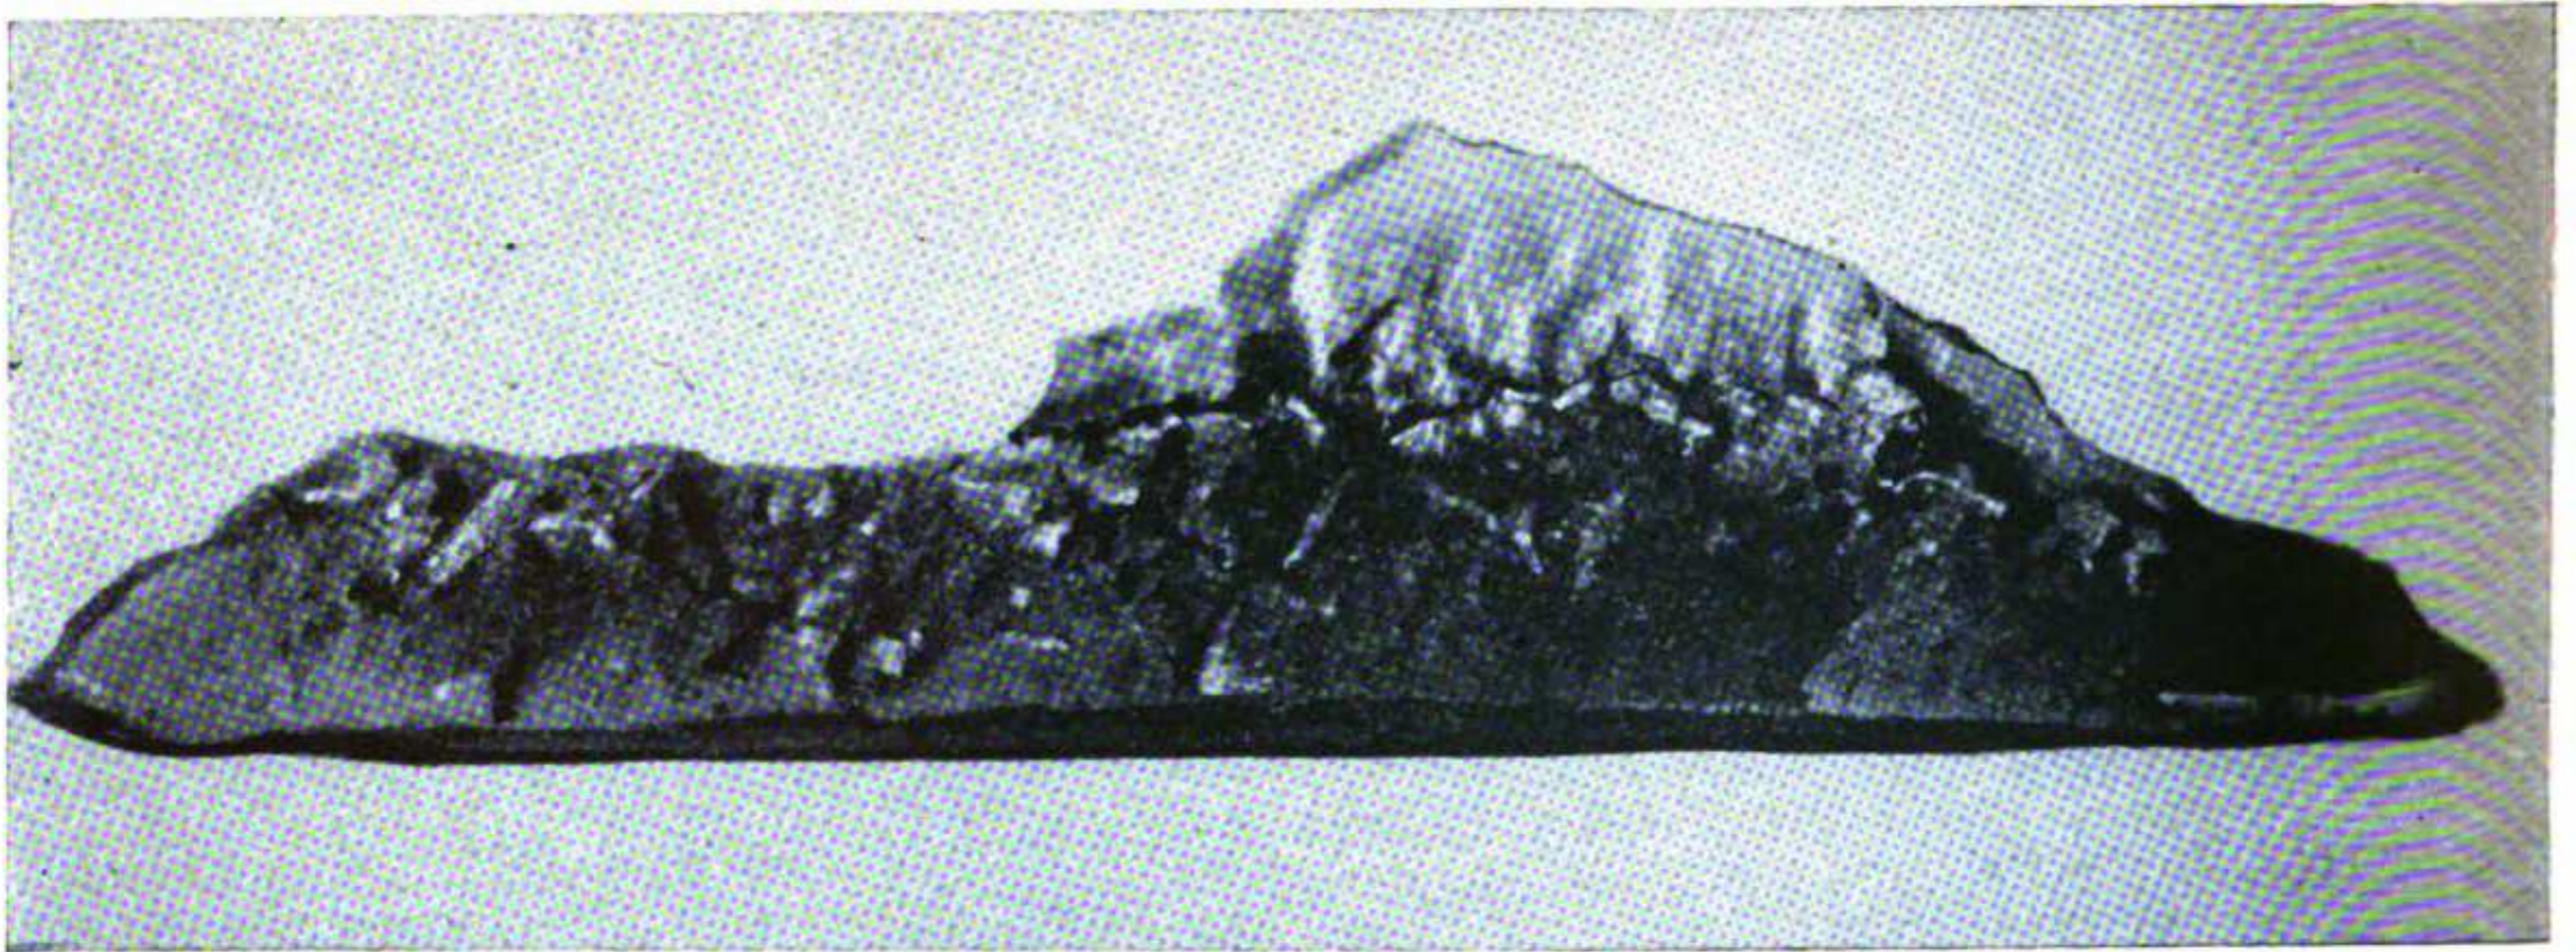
Piece of flange and tread which broke away from the wheel in figure 34.
